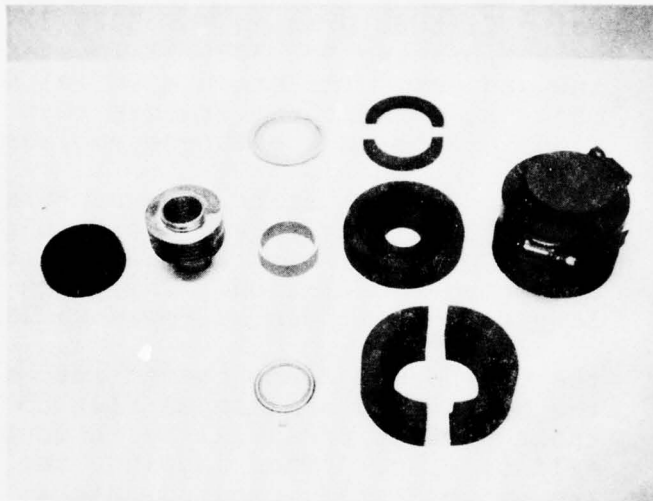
Revised Cathode Heat-Pipe Brazing Fixture: The cathode heat-pipe brazing fixture was modified to add a weight to the flange soldered on top of the ceramic. Since the flange diameter is less than the fin diameter of the heat-pipe, the weight is split into two halves so that it can be removed after brazing. A new weight was also designed for weighting the heat-pipe into the fixture.
